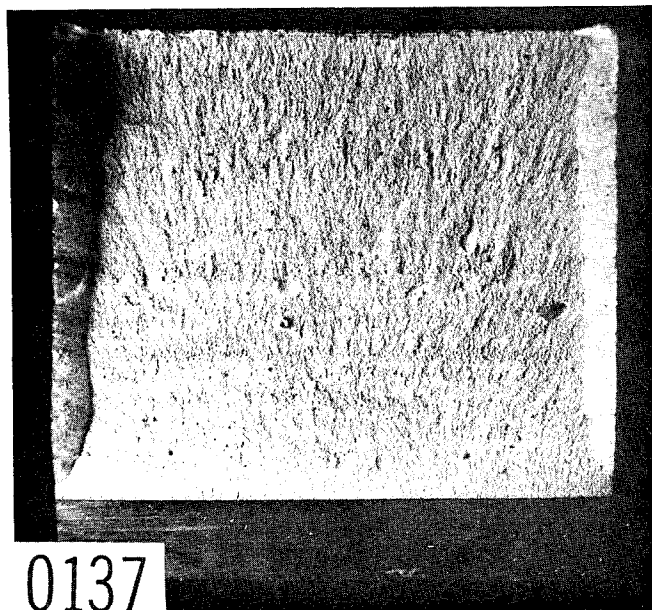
Slow bend fracture toughness specimen of 250 KSI yield strength maraging steel weld metal
